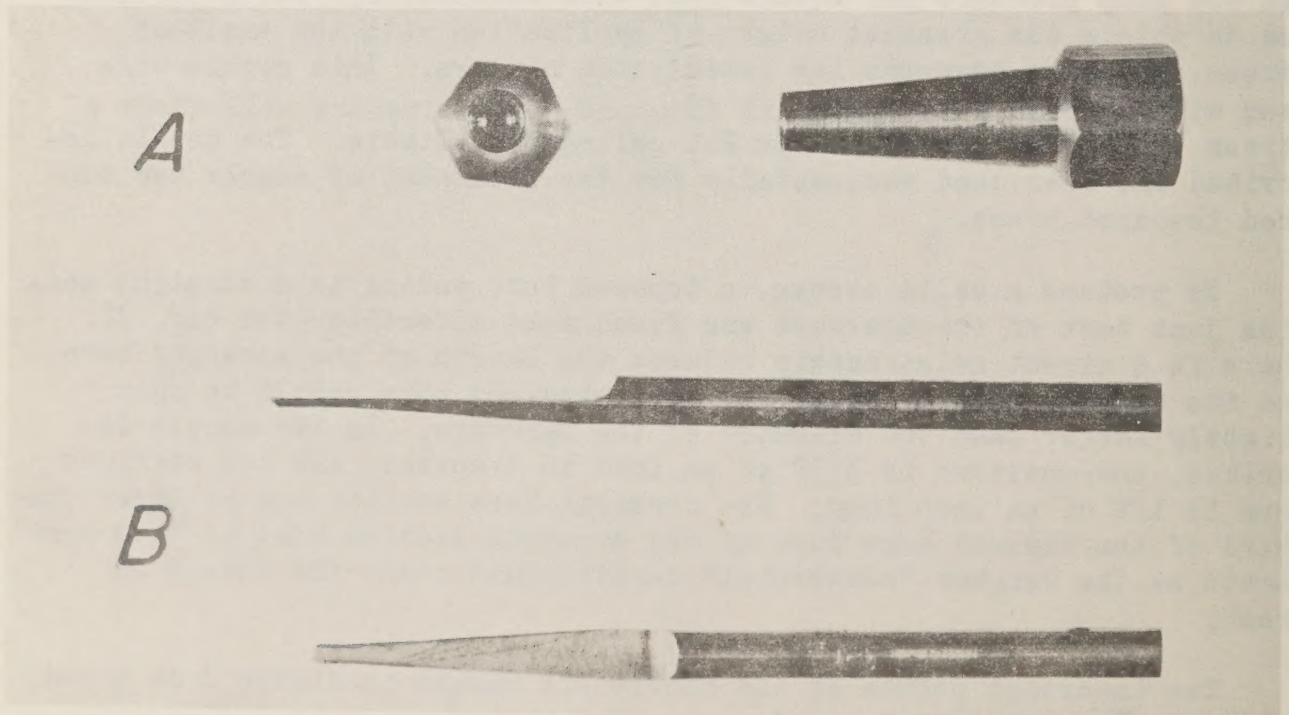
Solid-stream nozzle: A, Aperture and side view; B, reamer for cutting bore.
